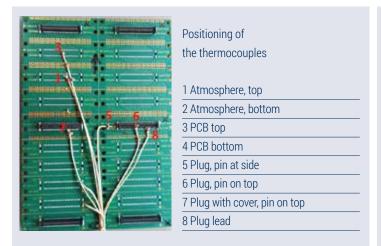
Plug	Connector	Test Board	with	Thermocouples
